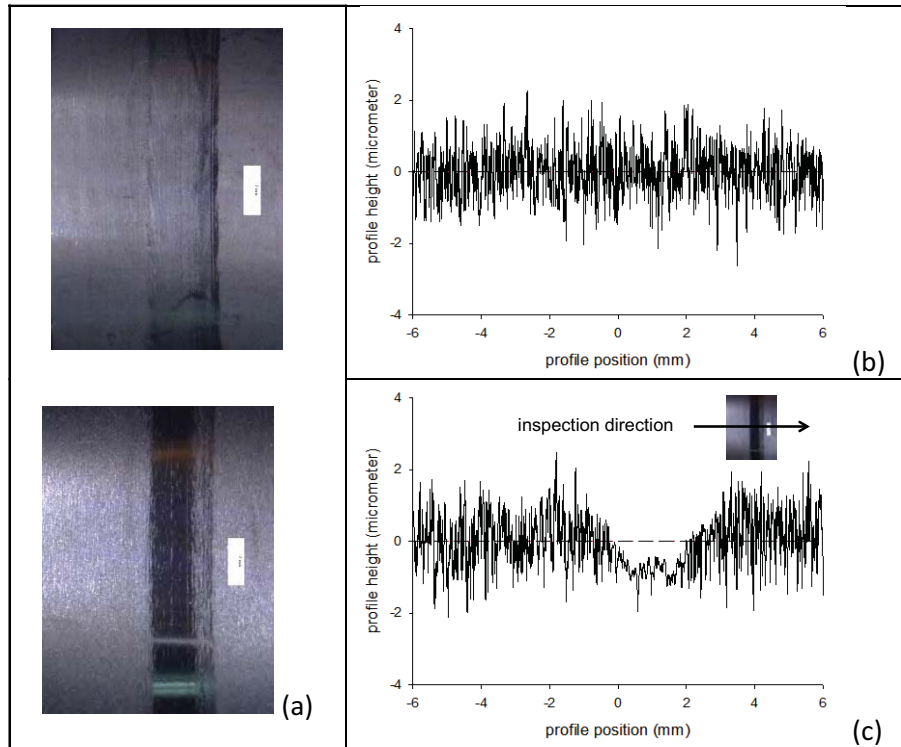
Data from Configuration 9. (a) Conditions of rollers, end of test. (b) Profilometer inspection, lower roller, start of test. (c) Profilometer inspection, lower roller, end of test.
